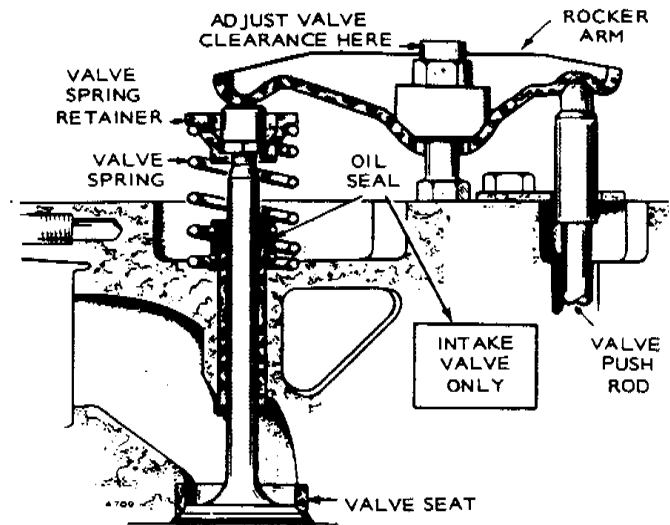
VALVE CLEARANCE ADJUSTMENTS
